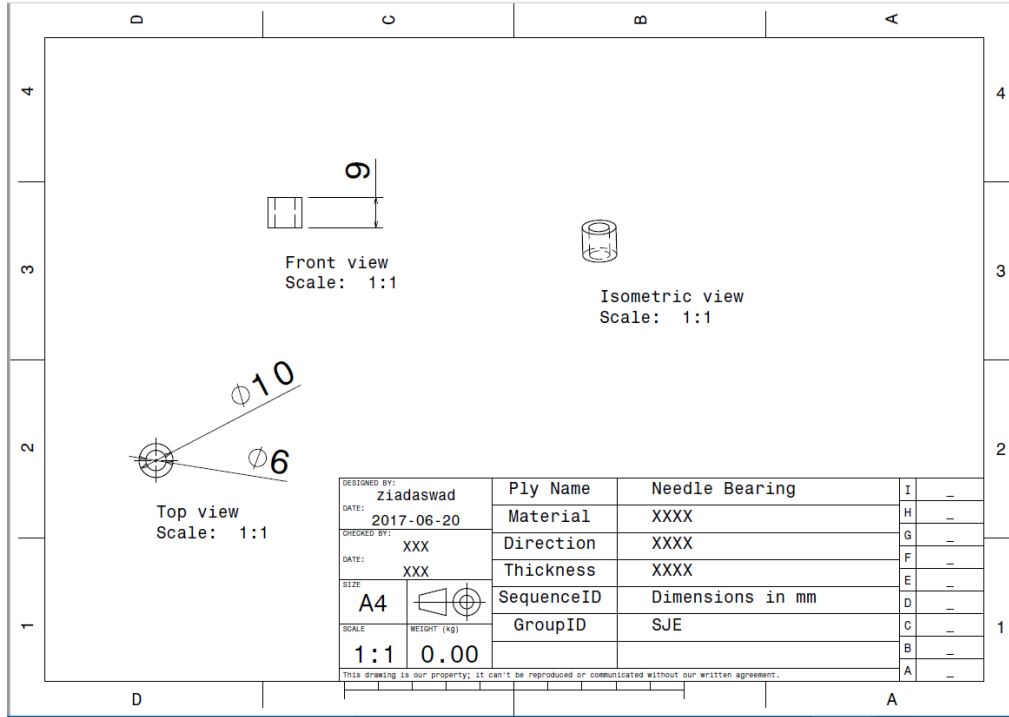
Needle Bearing for the Yoke CAD Drawing
